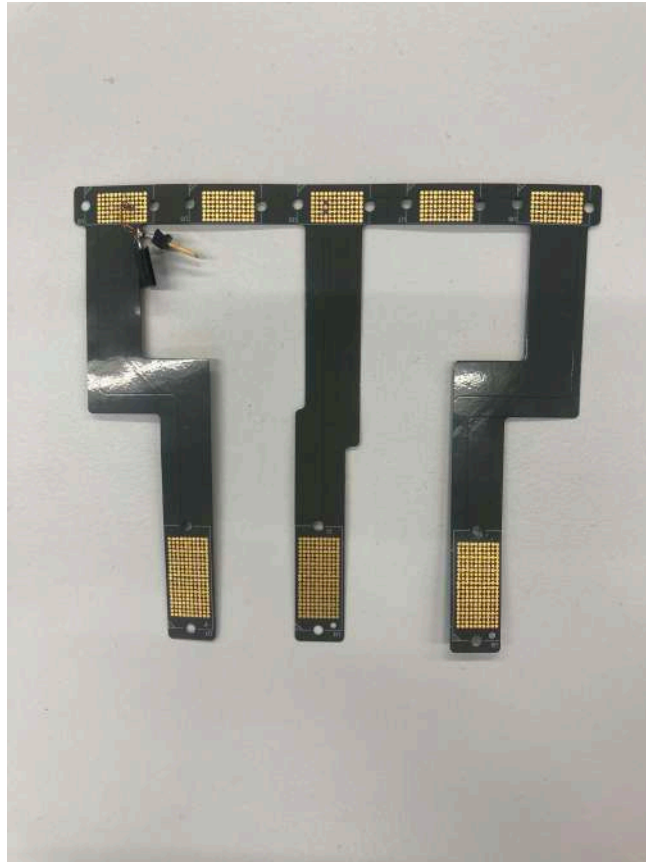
The endpiece-flex for a downstream cable with contact points soldered to two pads.
